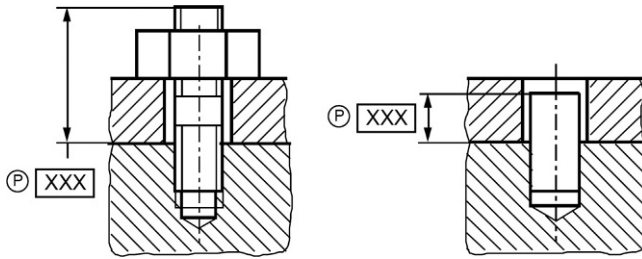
Projected tolerance zone for threaded hole and stud or for hole and pin
